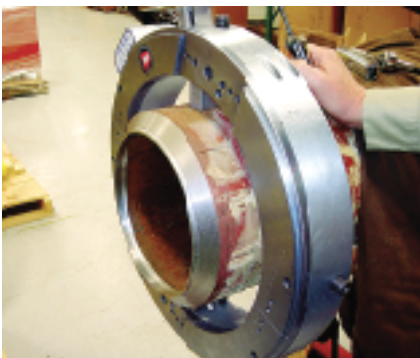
Cold cutting produces a precise, repeatable weld ready finish in a single step.
